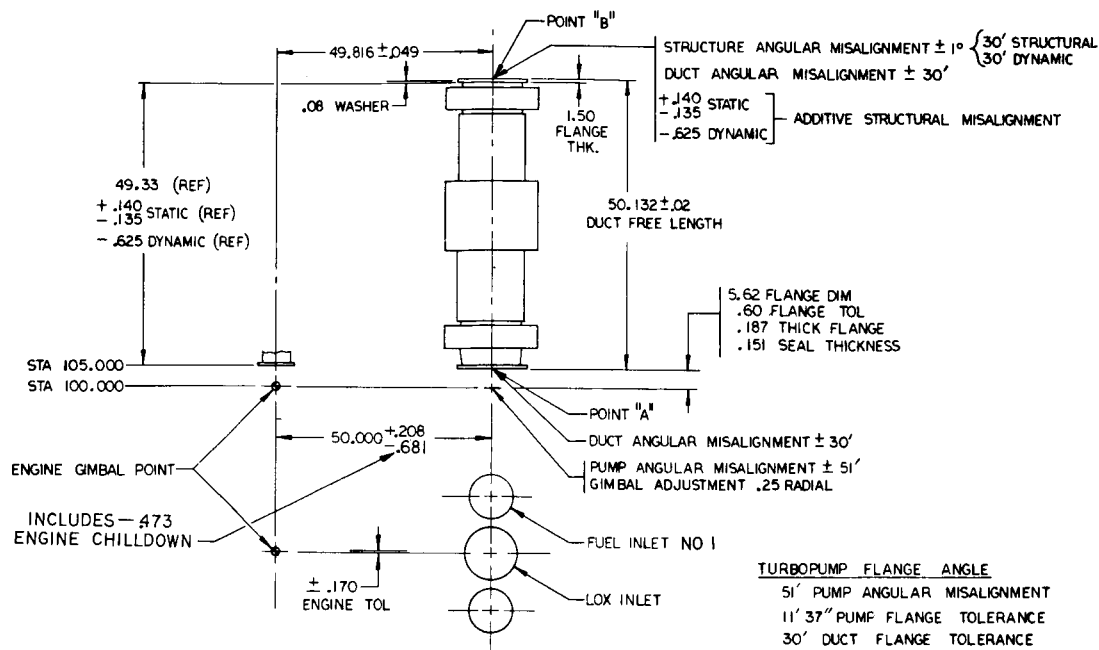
S-IC-T TOLERANCES AND DEFLECTIONS
